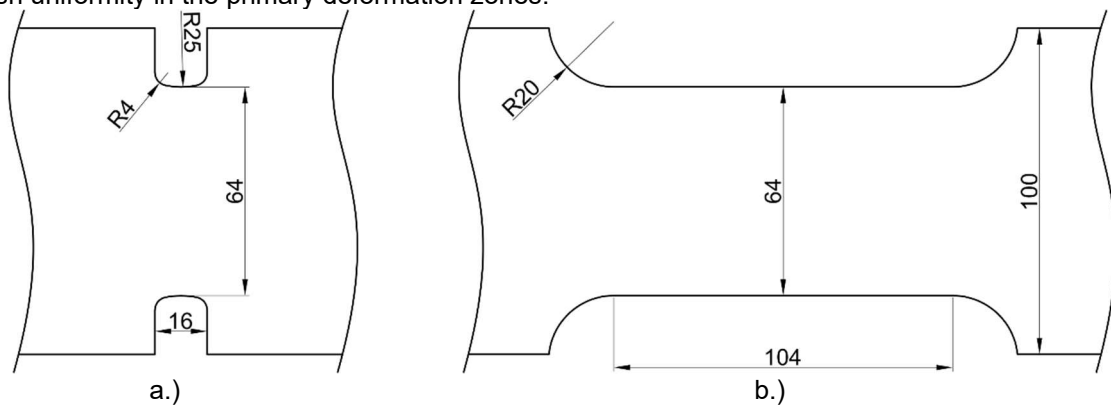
a.) Large scale plane-strain notch specimen and b.) Large scale uniaxial tension specimen.
